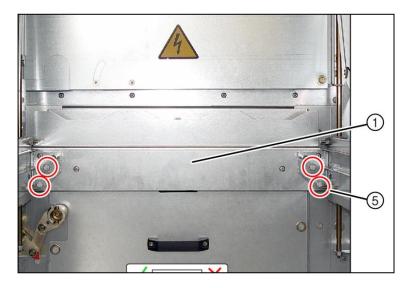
4 bolted joints on protection plate of switching-device compartment
